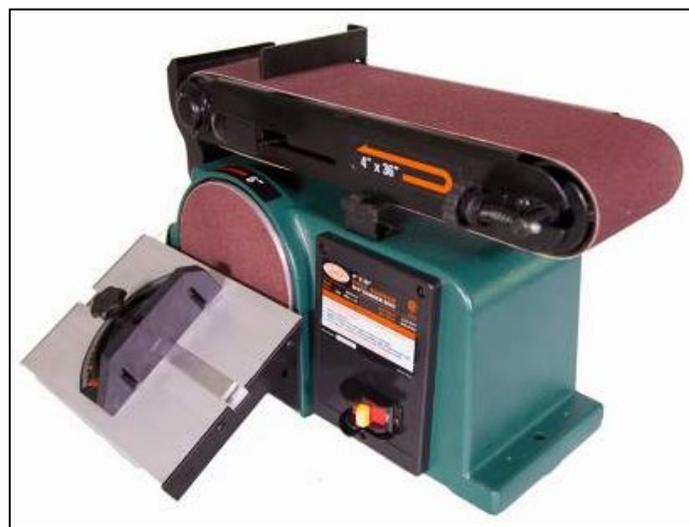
Belt sander for sandpaper grinder (Belt Disc Sander, 2021)
